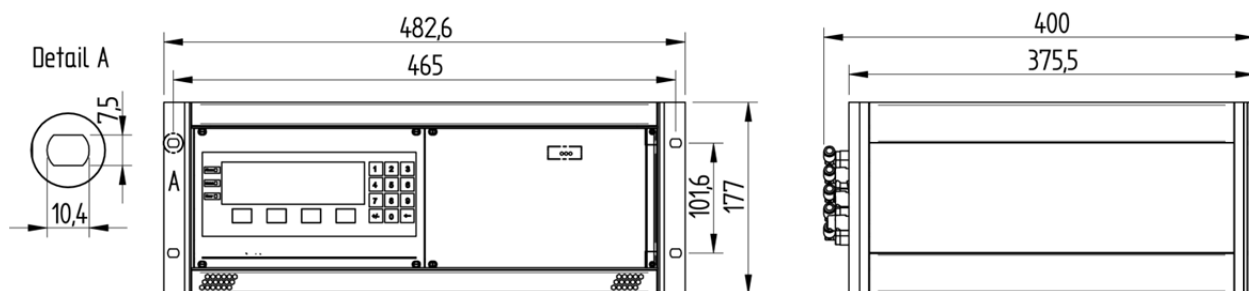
Dimensions (mm) of the electronic unit in 19" rack - SME 54
